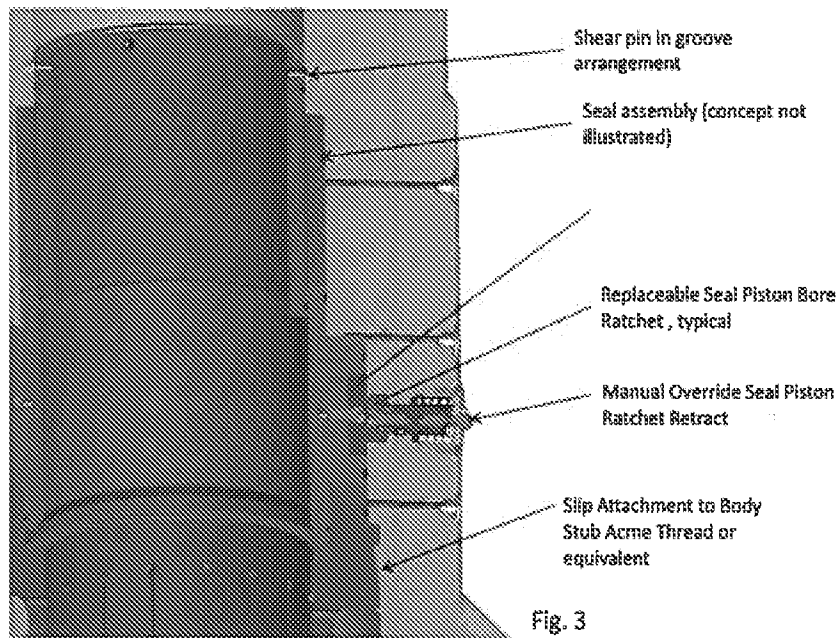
Seal, Piston, Ratchet design and Slip Attachment point
